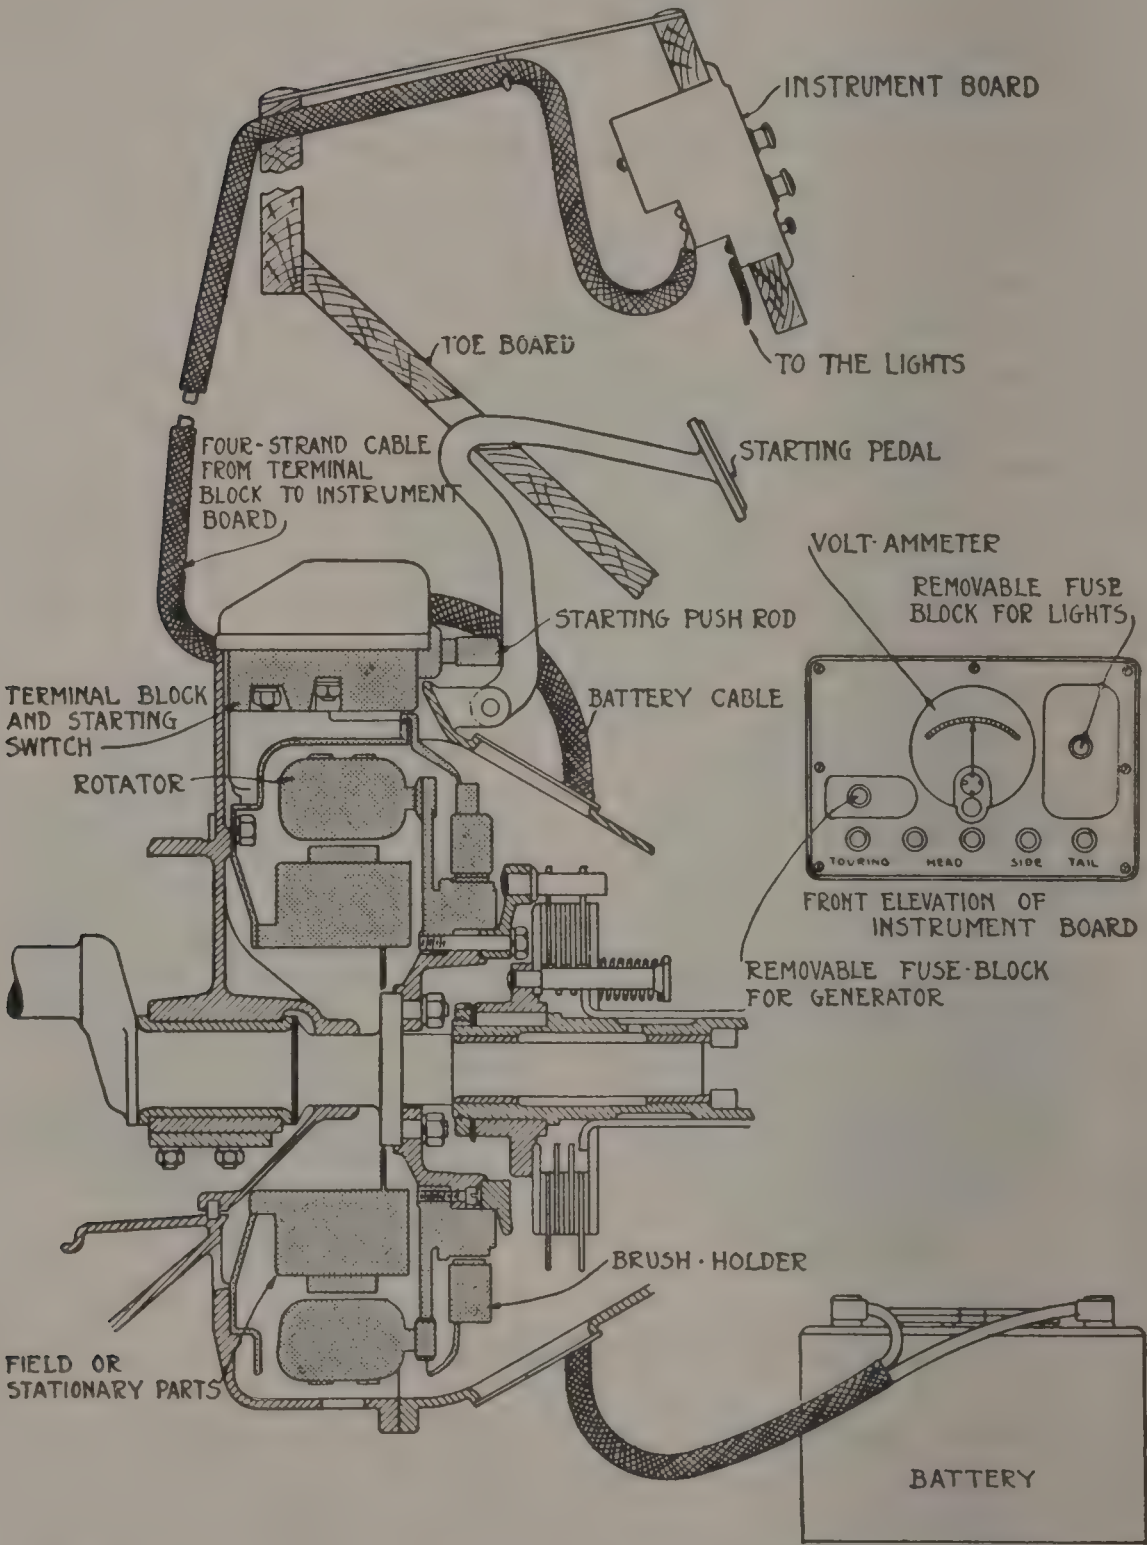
Section through assembled U. S. L. system. The parts shown in white are furnished by the maker of the car; those in shaded areas, by the U. S. L. company
